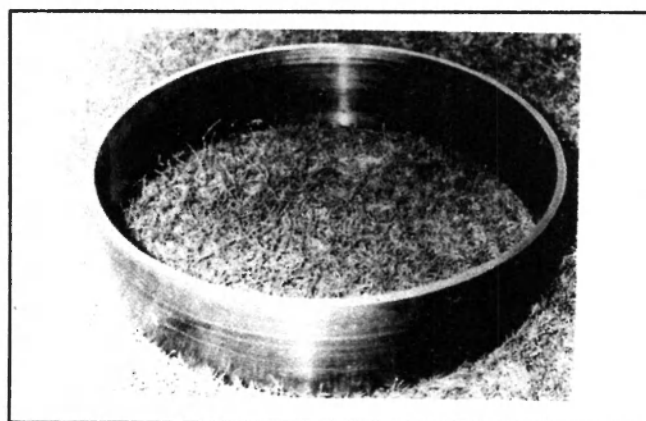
Proof Machined Ring Rolled in the "Alpha + Beta" Field
